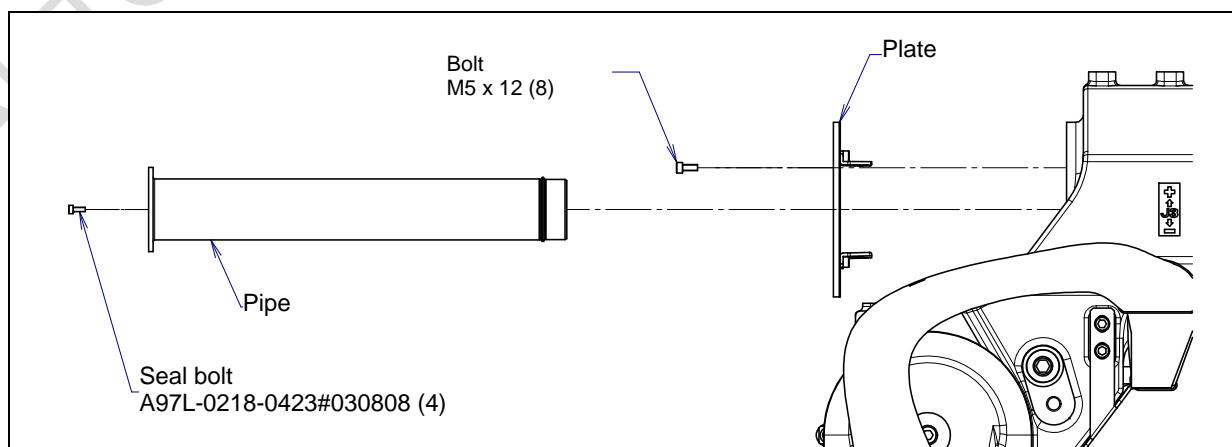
(b) Replacing cable kit (J3 casing part) (10M/10MS)
